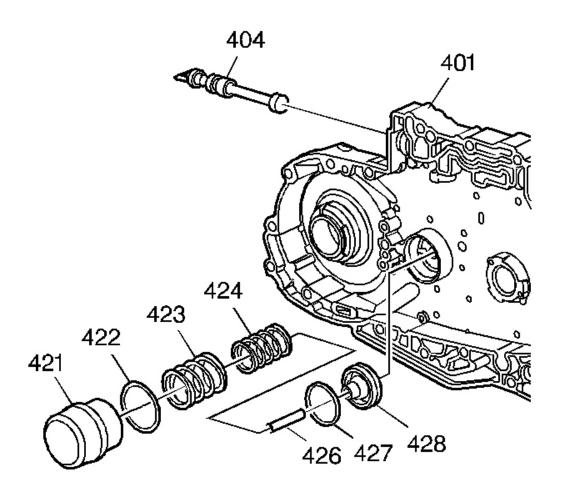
Locating 3-4 Accumulator Piston Components Courtesy of GENERAL MOTORS CORP.
